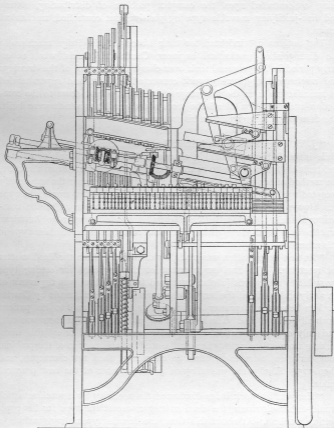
Felt composing, line-justifying, and distributing machine.
